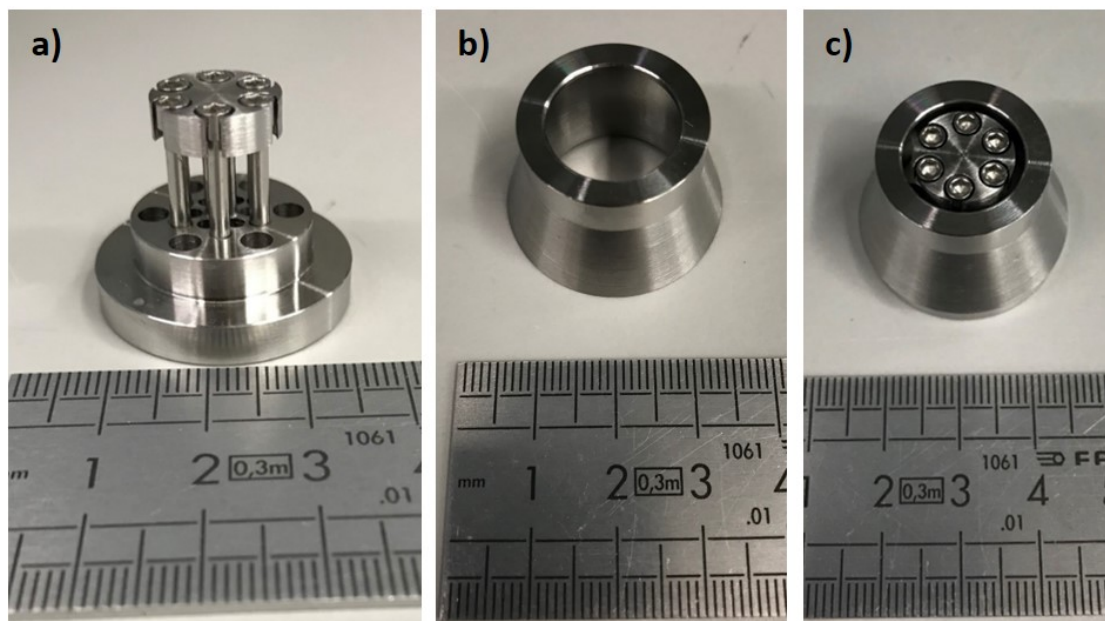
a) Base of the complex die with the 6 screwed pins, b) ring die and c) assembled complex die.
